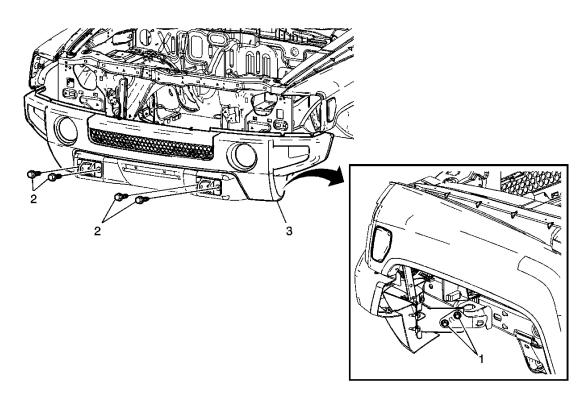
Identifying Front Bumper & Fasteners Courtesy of GENERAL MOTORS CORP.
